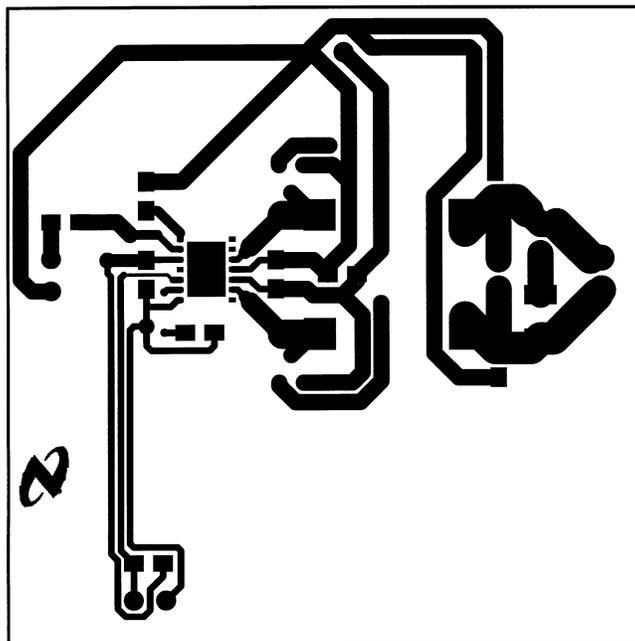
Recommended NHH0014A PCB Layout Top Layer
